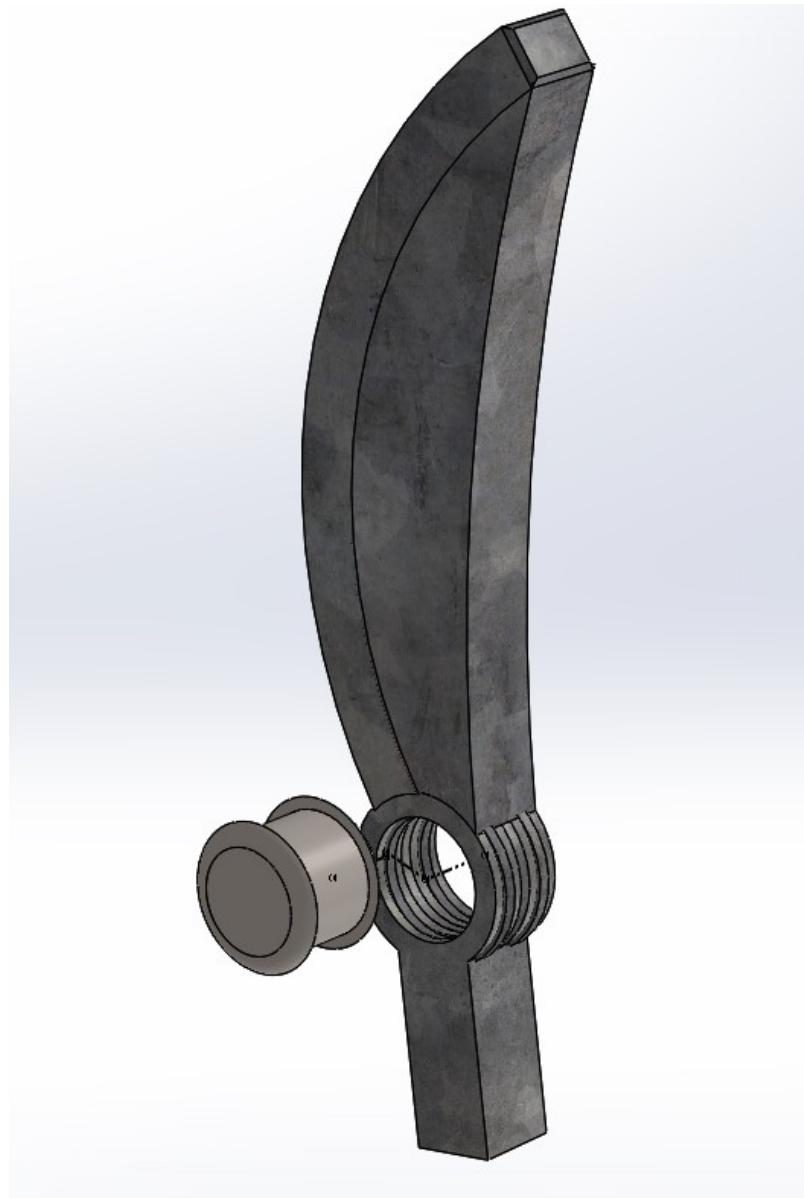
Sackett, Justin: Assembly Step 4
